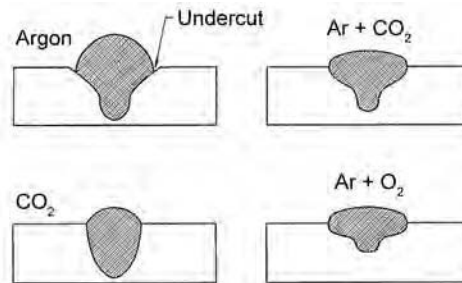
Effect of shielding gas type on weld penetration and shape for steel
